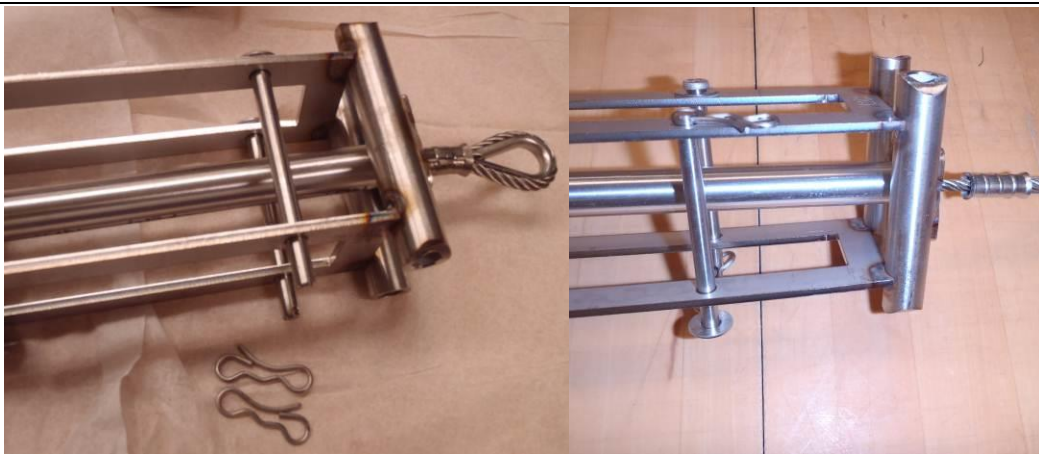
Pins, washers and cotter pins to keep the sheets in place (mounted in the holder)
